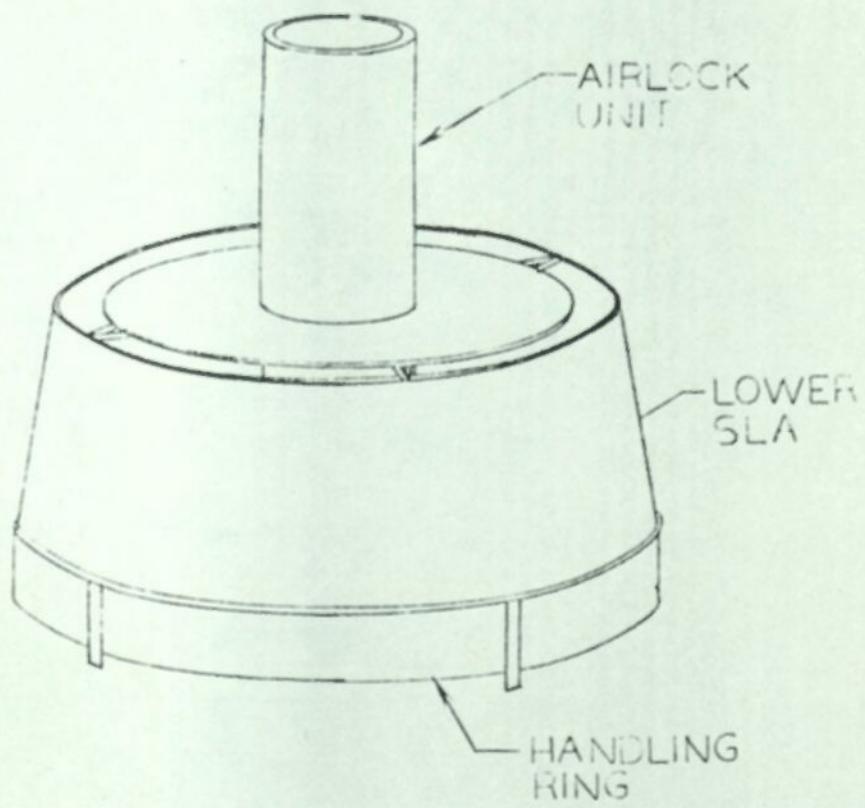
SSESMA AND LOWER SLA ASSEMBLY
